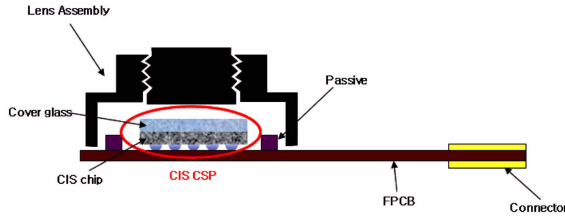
Corss-sectional structure of CCM assembly using CIS CSP
